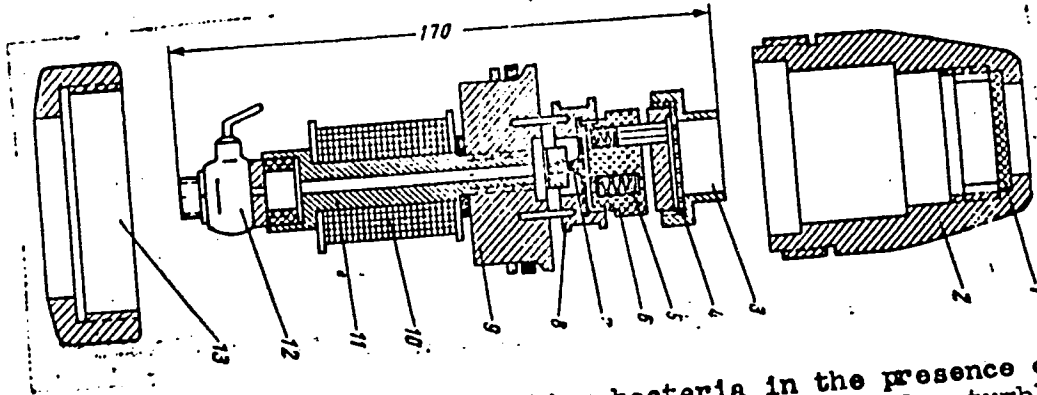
Chamber for irradiating bacteria in the presence of compressed gases. 1 - opening, 2 - chamber body, 3 - tumbler for bacteria, 4 - porous glass, 5 - valves, 6 - compressor, 7 - compressor membrane, 8 - magnet armature, 9 - bottom of chamber, 10 - magnet winding, 11 - magnet core, 12 - cock, 13 - nut.
